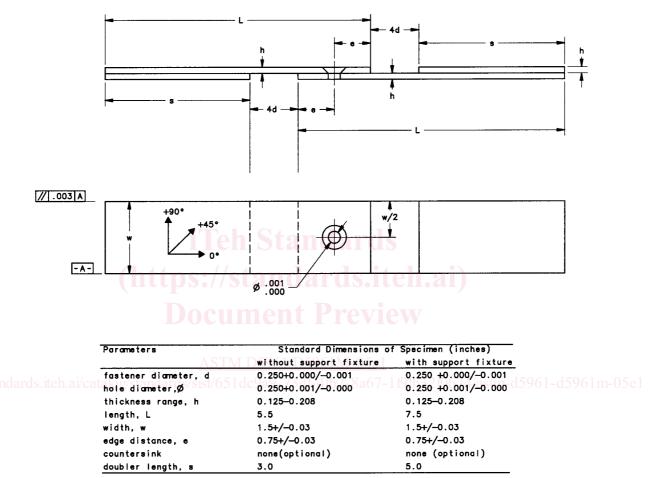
Single-Shear Test Specimen Drawing (Inch-Pound) (See Fig. 8 for details of double-fastener version.)
